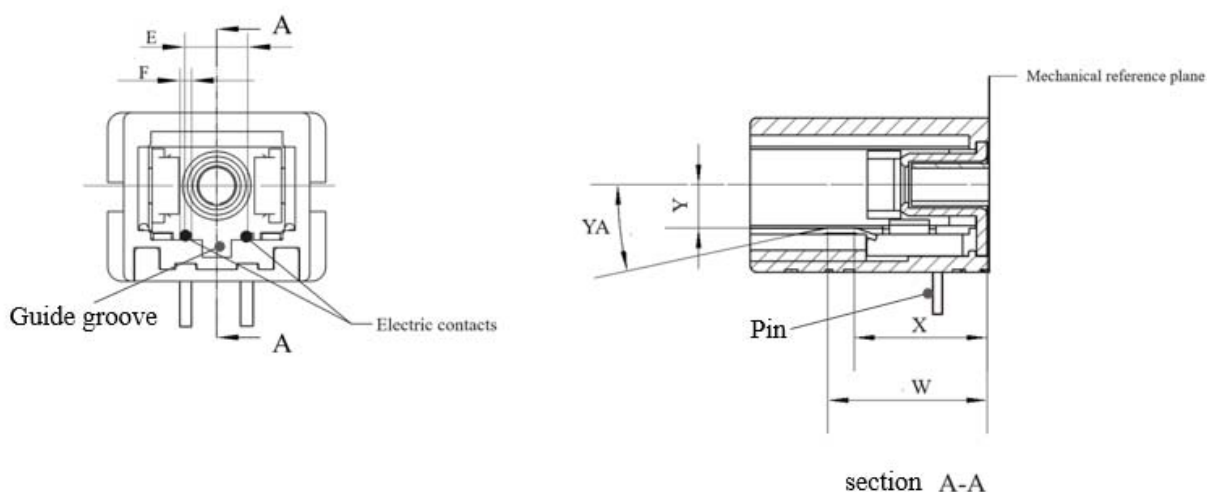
Interface for type SC hybrid adapters mounted on printed circuit boards
